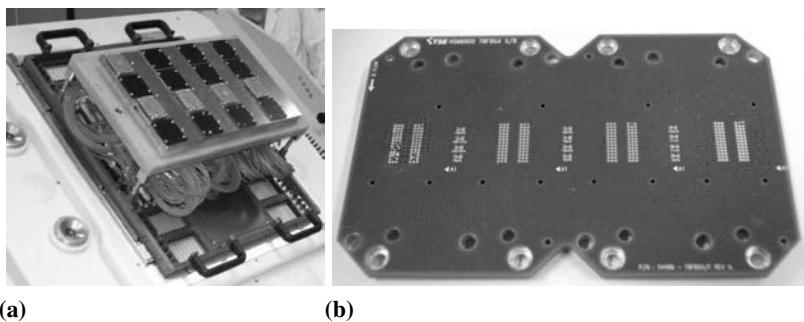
Example of (a) a multisite high-speed memory testing test fixture without the cover showing the cabling to the socket boards and (b) a socket board for four DUT sockets (courtesy of Verigy).
